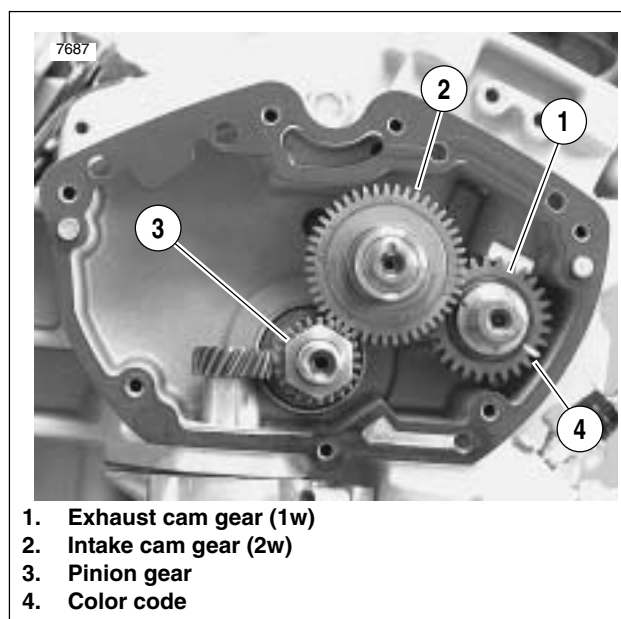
Cam and Pinion Gear Color Code Location and Timing Mark Indexing
